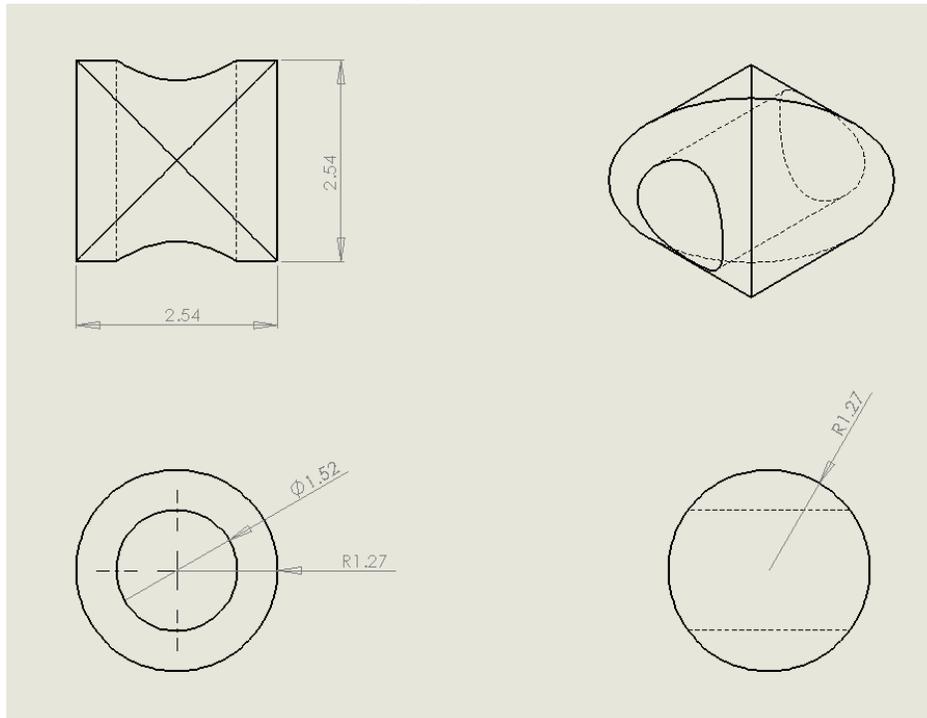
Plastic Slider for Second Alignment System: This piece allows the sliding inner bolt to attain 30° of angular alignment in the vertical direction and 360° in the horizontal direction. By altering the slider's placement in the pylon, additional degrees of vertical alignment may be attained. The piece may be manufactured using a band saw, drill press, and sander, or using primarily a water jet. As for the previous prototype, dimensions should be proportionally scaled to match the required pylon and need for load bearing.
